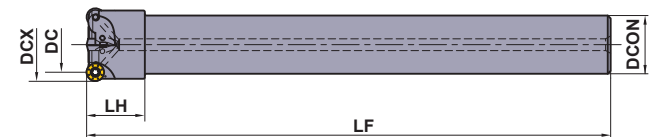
(Non-center Cutting Edge Type (Multi-tooth))
